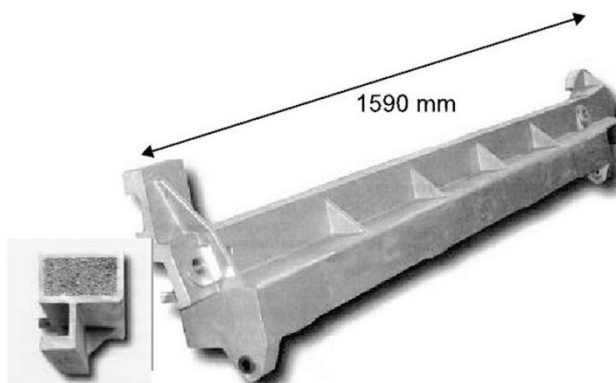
Machine tool crossbeam with aluminium foam core [13]
